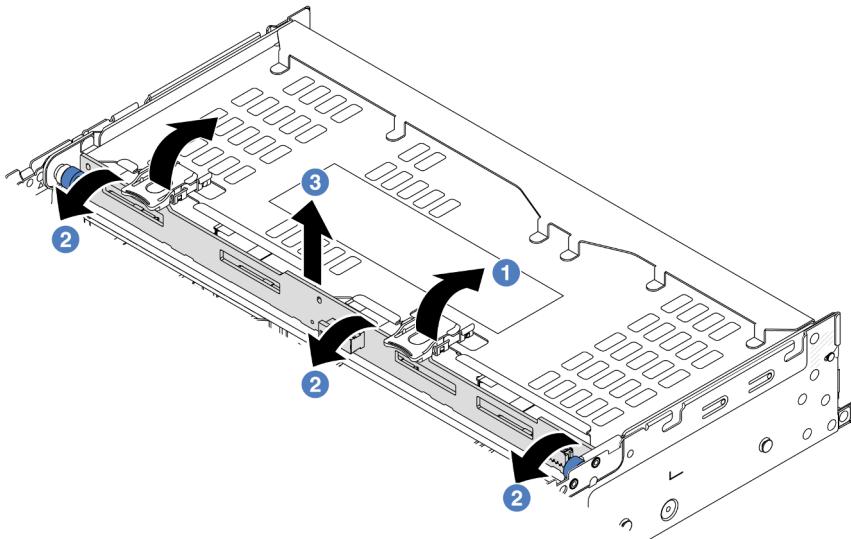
Removing the 2 x 3.5-inch rear drive backplane
